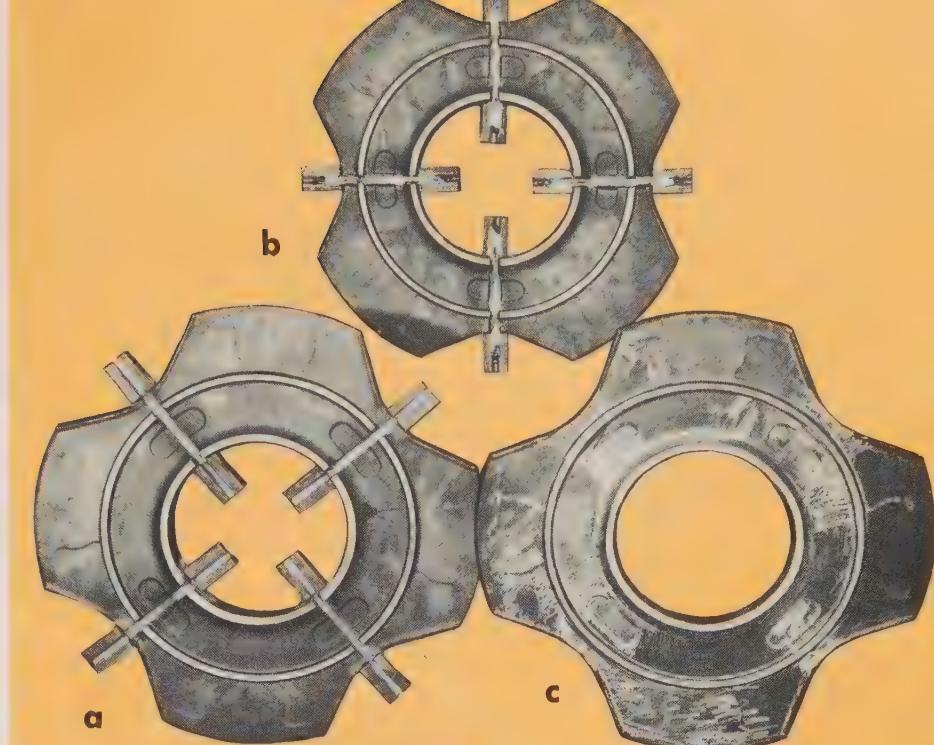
The completed stress member sub-assembly consists of four identical steel forgings welded together by two different welding methods—flash butt-welding and submerged-arc welding. A burn-off allowance of  $\frac{1}{8}$  in. is allowed on each end of each forging when the flash butt-welding operation is used. When the stress member sub-assembly is fabricated by the submerged-arc welding operation, the individual forgings are first machined at the joints and tack-welded together. Then waster plates are attached *a*, and, finally, the piece is submerged-arc welded *b*. The waster plates are then removed by a flame-cutting operation to give the completed sub-assembly *c*. The view at the right shows the piece after it is machined and ready to be stacked.
